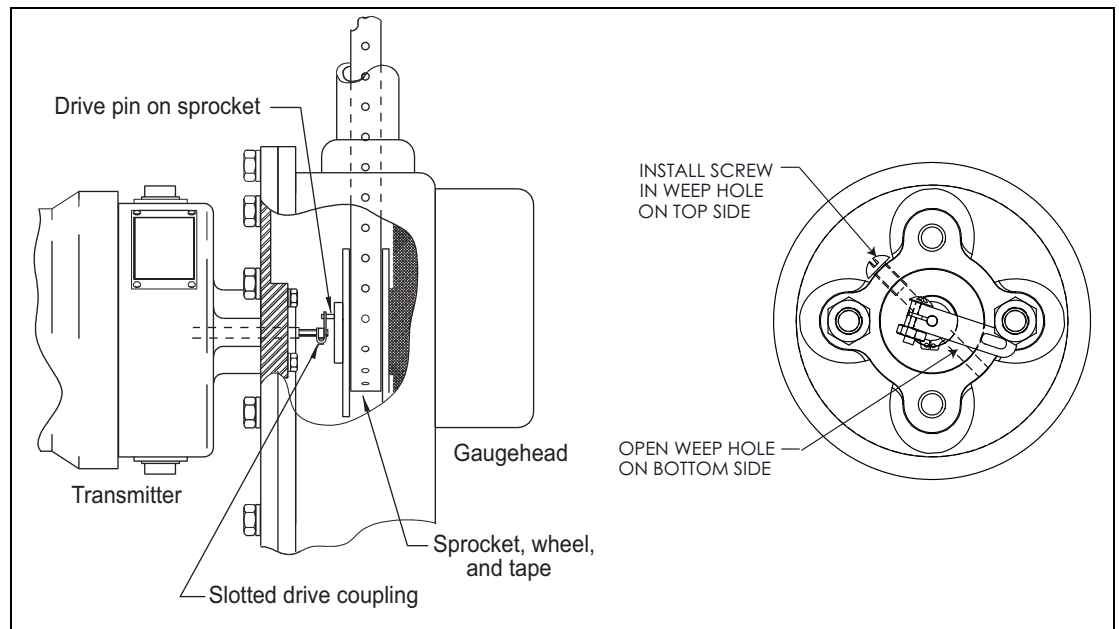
Typical Transmitter Mounting and Weep Hole details
